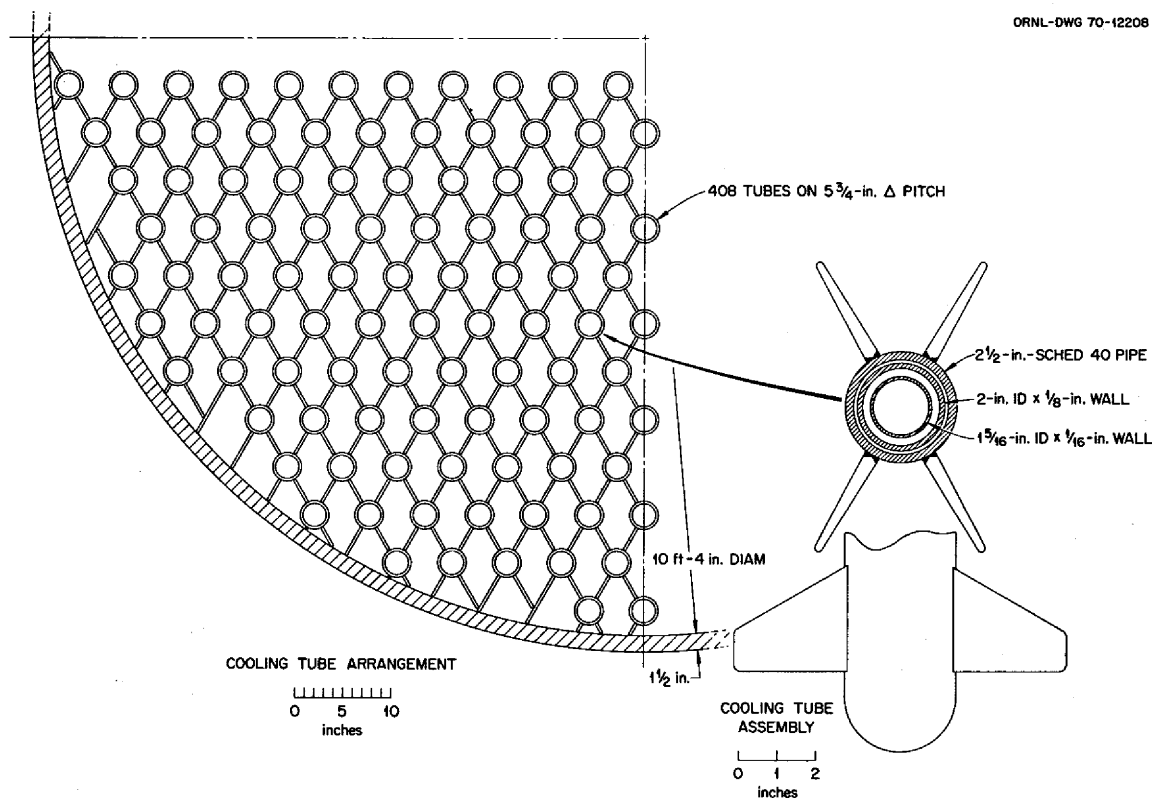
Cooling Tube Layout on Head of Primary Drain Tank.
